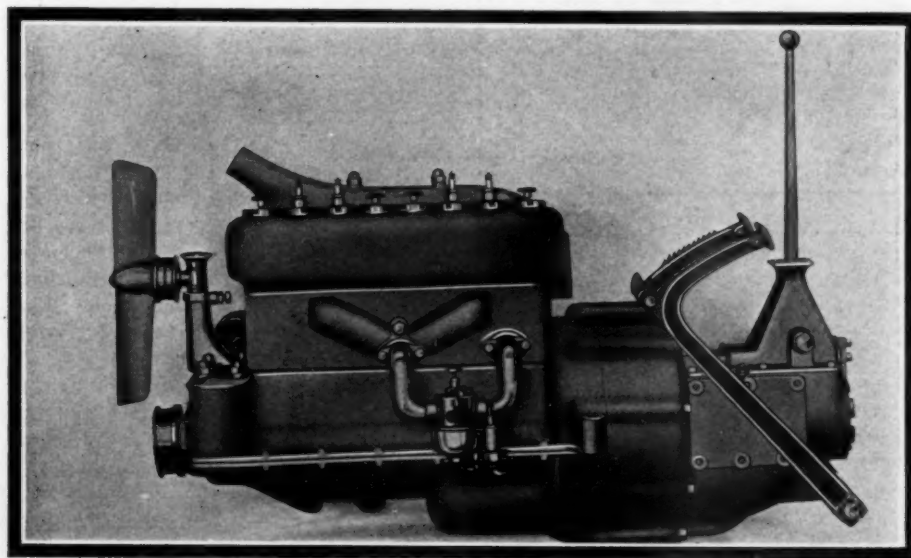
Left side elevation of the King bloc motor, showing the carbureter in place, and a type of gas intake that is designed for silence
